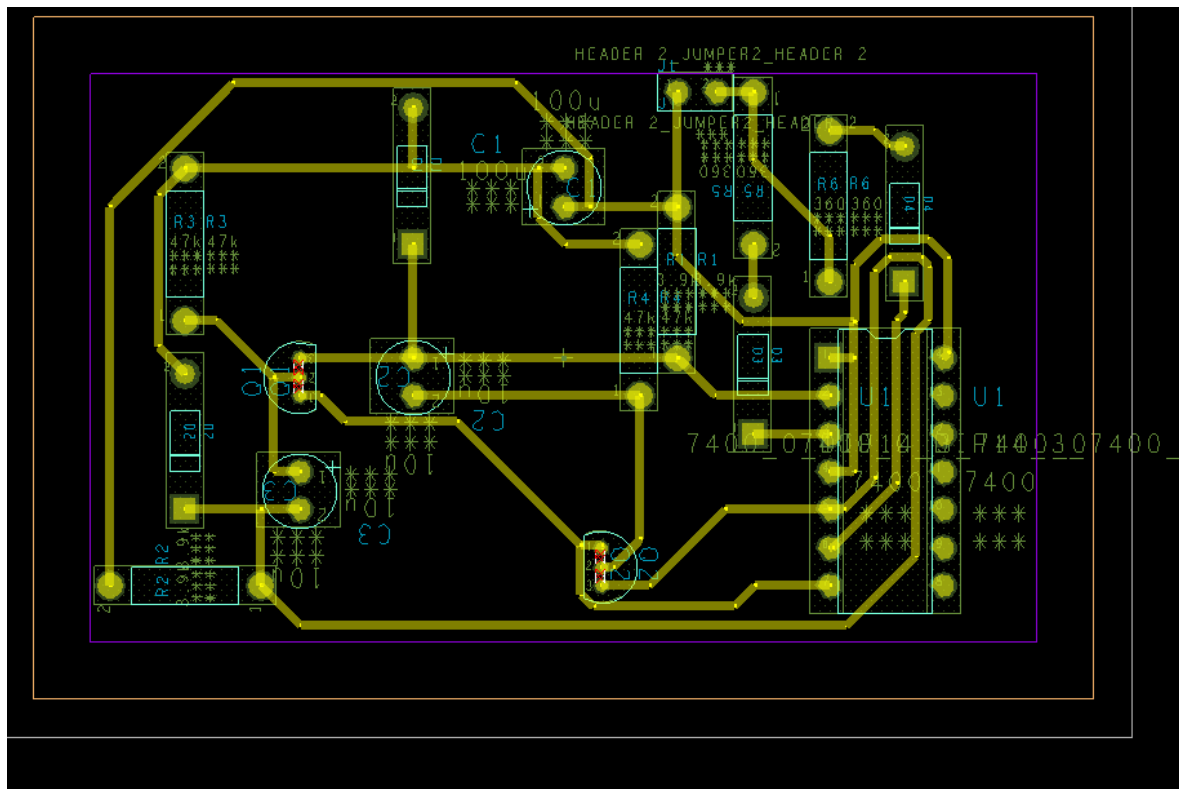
Placement of the components on the PCB and ratsnest.
